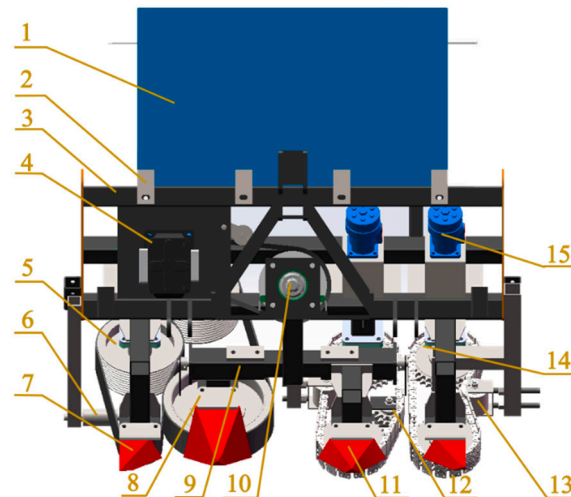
Cotton straw-harvester structure diagram: (1) hydraulic oil tank; (2) retainer; (3) machine skeleton; (4) JHP3200 hydraulic pump; (5) drive pulley; (6) drive pulley; (7) grain elevator; (8) tensioning pulley; (9) tension beam; (10) input shaft; (11) driven sprocket; (12) tension sprockets; (13) tension sprockets; (14) tension sprockets; (15) BM2-100 hydraulic motor.
